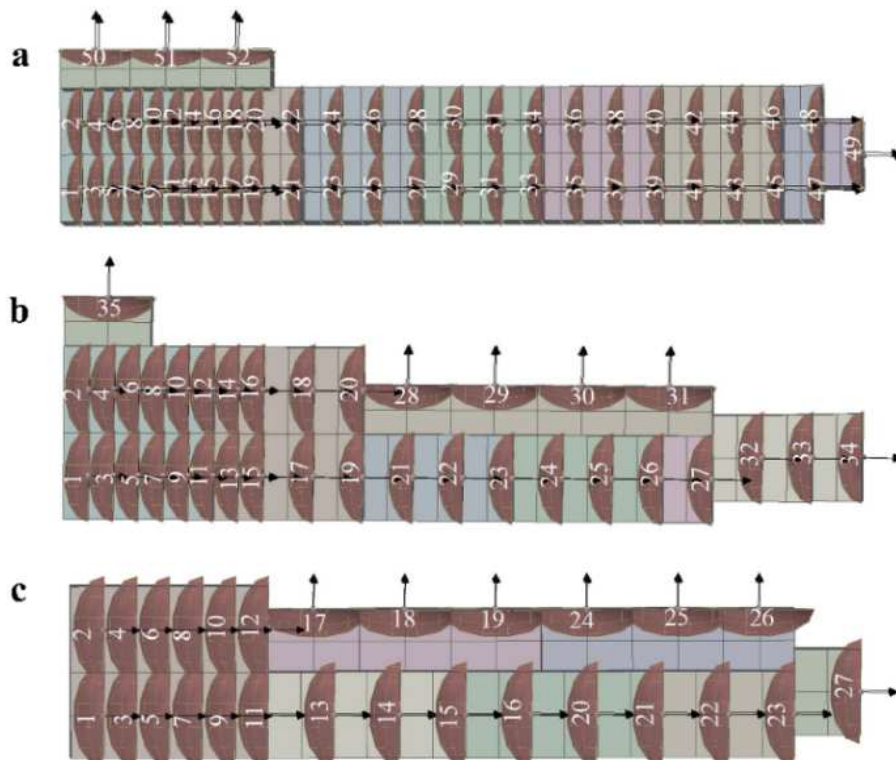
Schematic top view of the weld metal and the welding passes for different heat input levels, (a) 0.132 kJ/mm, (b) 0.18 kJ/mm, (c) 0.234 kJ/mm.
